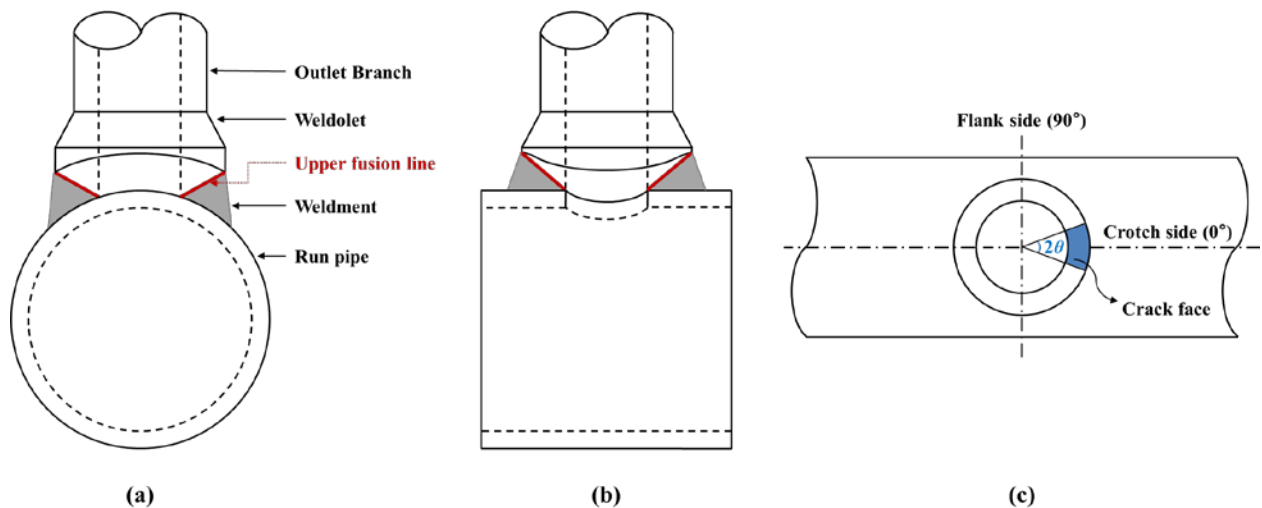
Geometry of a T-branch with weldolet; (a) side view (b) front view (c) crack location and shape at crotch side
